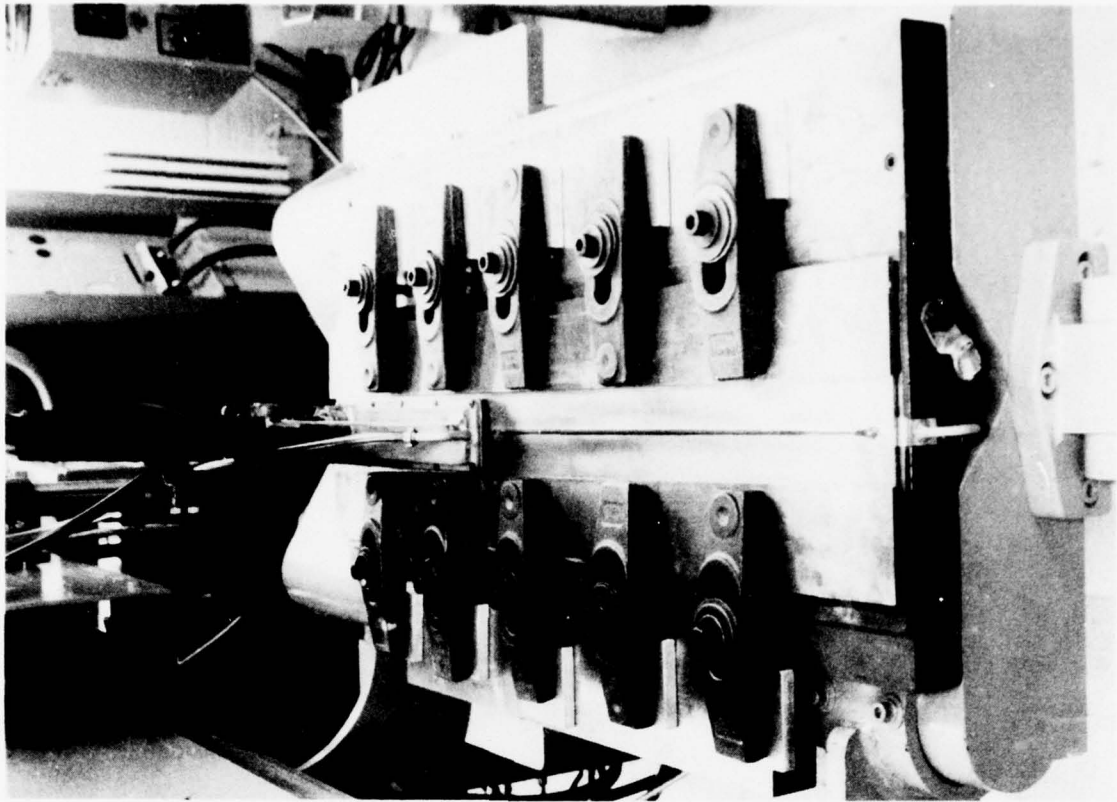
One-Foot-Long Trailing Shield and Welding Fixture
